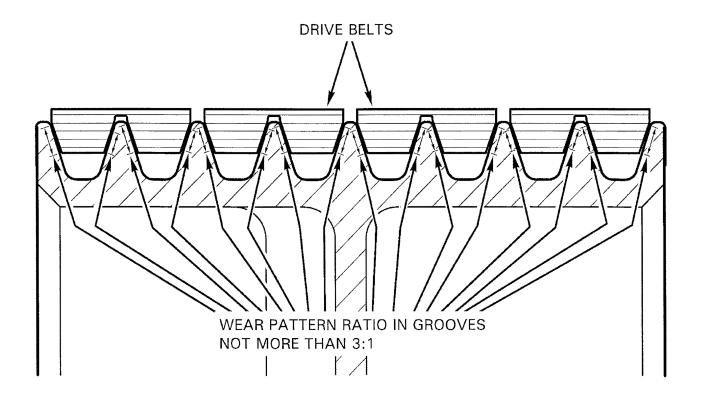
LOWER SHEAVE V-BELT WEAR PATTERN
